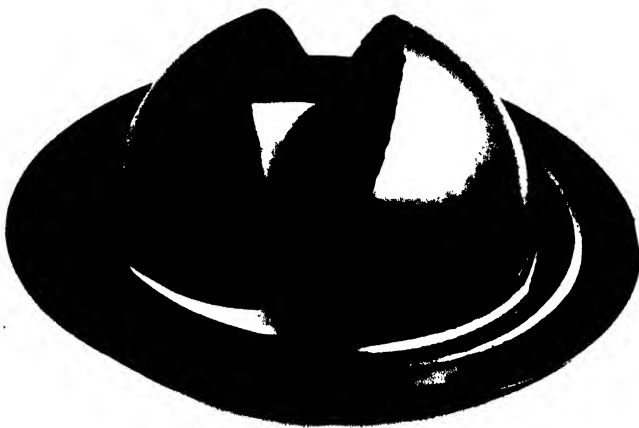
Steel shell burst during first draw owing to presence of severe internal discontinuity in the sheet.
